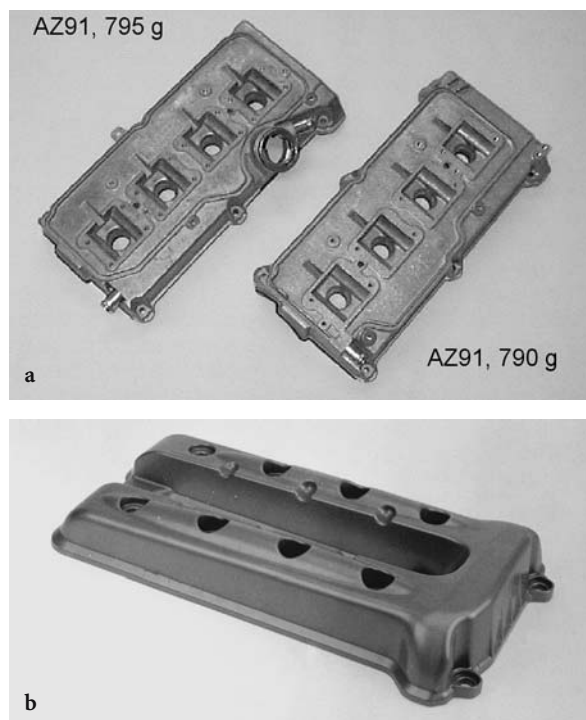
a Cylinder head cover (Audi V8/AZ91); b BMW (AZ91/929 g)
